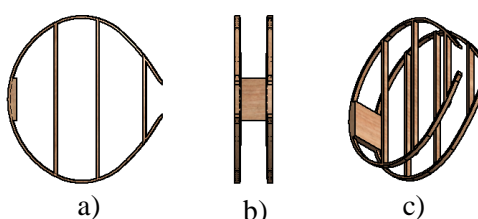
Gluing grid with the braces: a) Front view, b) side view c) perspective.
